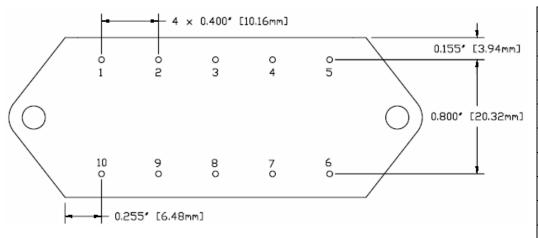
Flanged, Solder Seal Tin Plated Package and Pinout (Not Used for /HB or Higher Screened Products) (Dimensional Limits are ±0.005" Unless Otherwise Stated)
